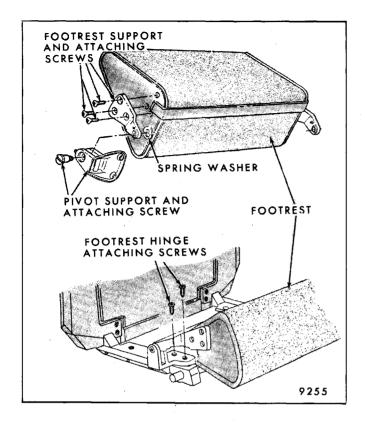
Auxiliary Seat Footrest Assembly - Removal and Installation - Cadillac Limousine Styles
